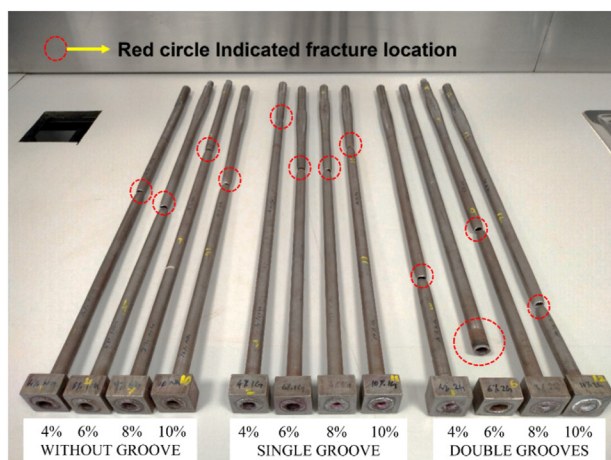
Fractured hybrid welded-expanded tube and tubesheet joints after tube pull-out test.
